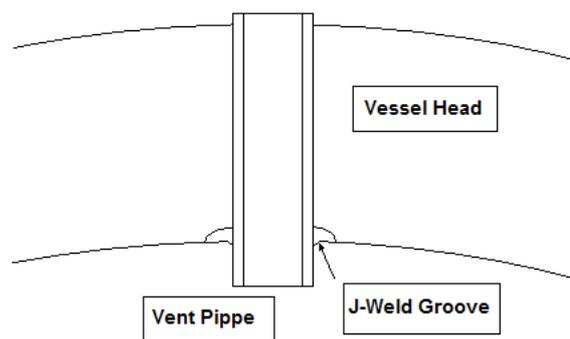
Sketch of the J-Weld groove to be inspected
